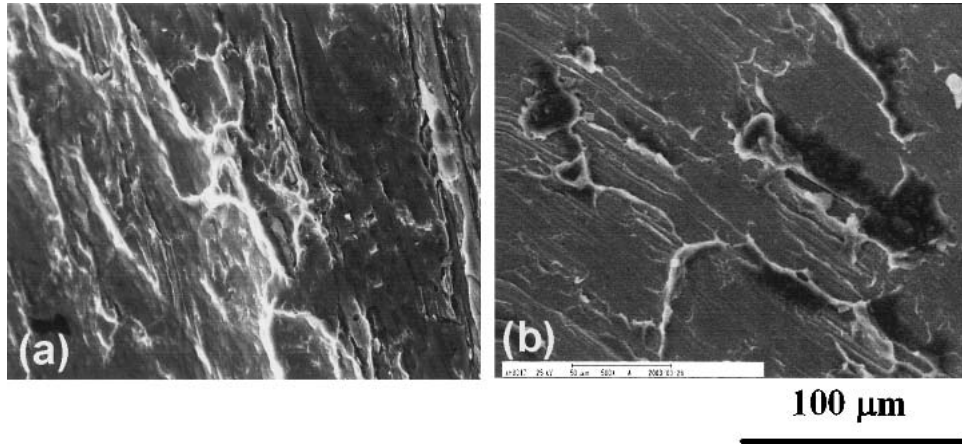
Fracture surface of the (a) aluminum side and (b) steel side for joints welded at a rotation speed of 16.7 s^{-1}
